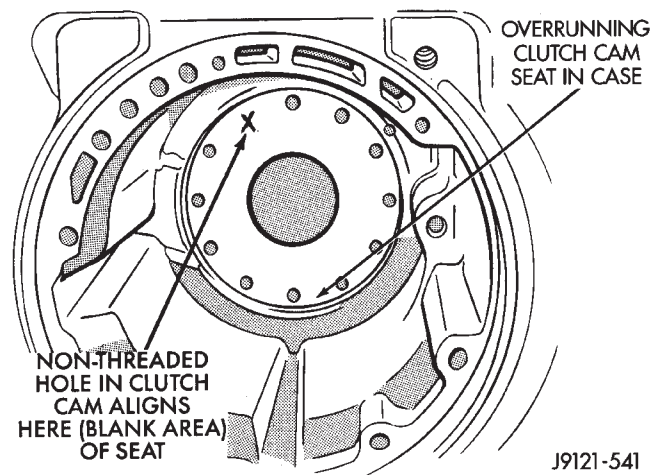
Location Of Blank Area In Clutch Cam Bolt Circle
